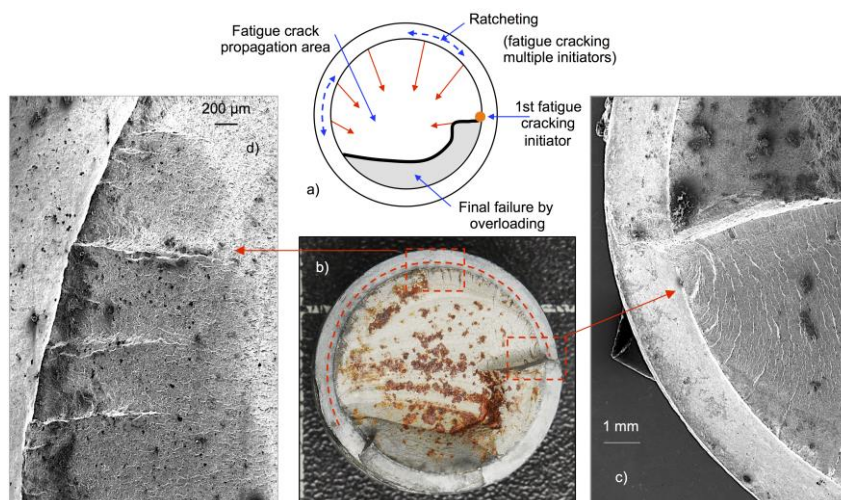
Threaded bolt rupture: a) sketch of the macro mechanism of fracture; b) macroscopic image of the surface rupture; c) detail showing the 1st fatigue cracking initiation site; d) detail capturing some of the ratcheting marks formed at bolt surface by multiple fatigue cracking initiators
